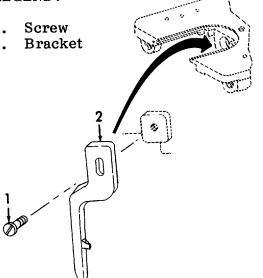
Bobbin Case Positioning Bracket, Removal.
